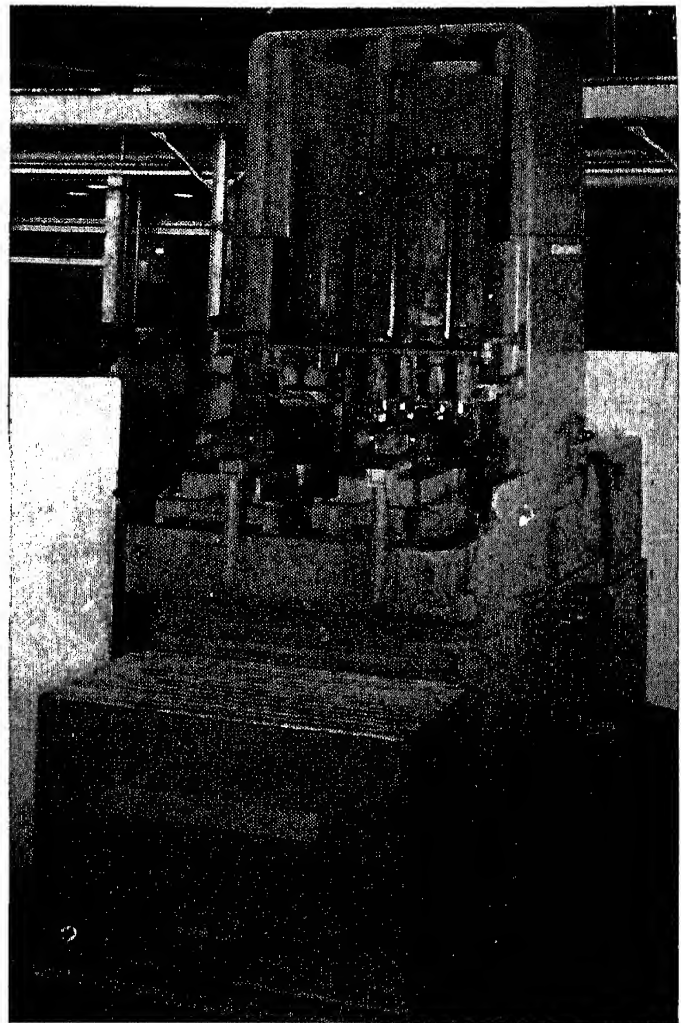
A 10 ton vertical duplex surface broaching machine with a 66 in. stroke. (Courtesy The Cincinnati Milling Machine Co.)
